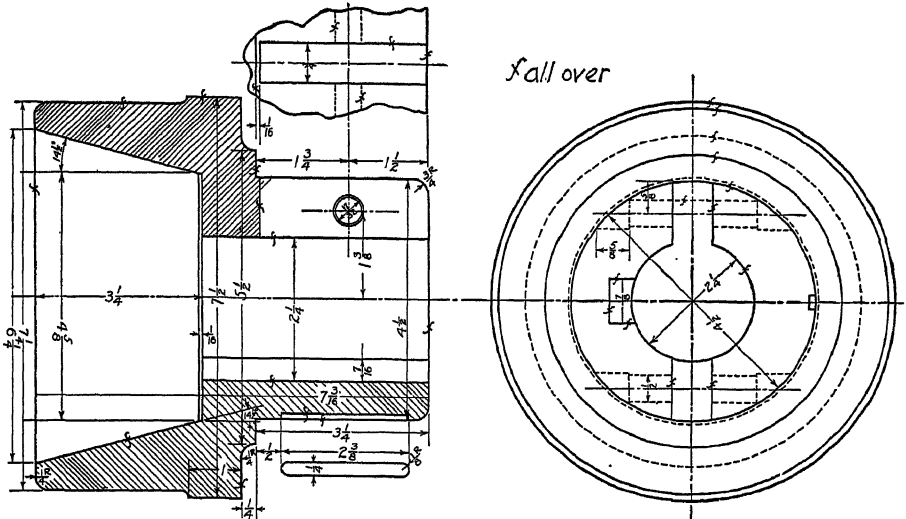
An incorrect drawing to be checked for errors (driven cone).
